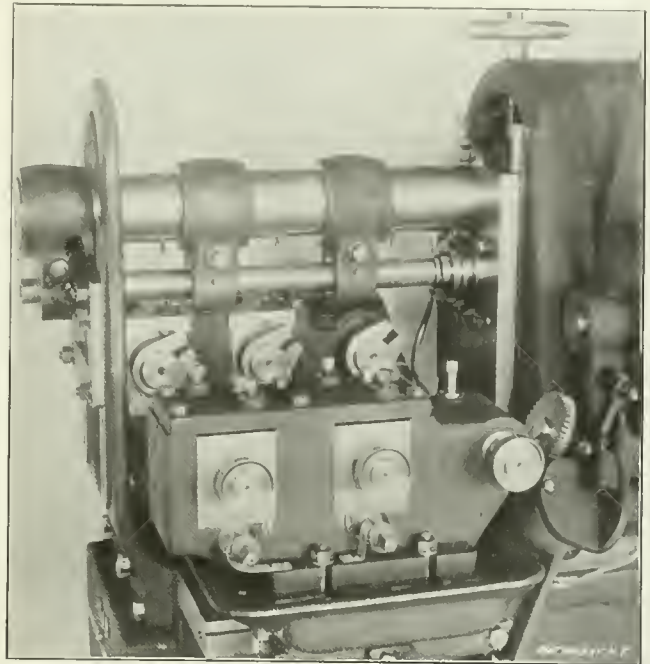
Index Milling Machine equipped with 3-spindle Centers
